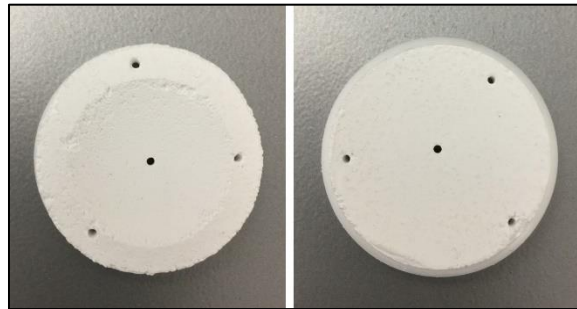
A vacuum chuck used to hold a barium fluoride tile for machining and the tile showing machined slots.
